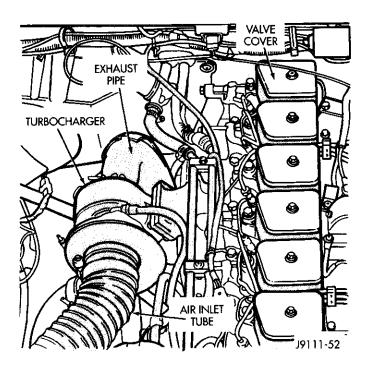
Air Intake Pipe, Exhaust Pipe and Turbocharger
